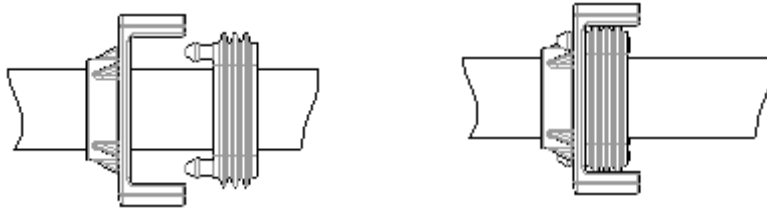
MOUNTING SINGLE WIRE SEAL ON COVER SEAL
